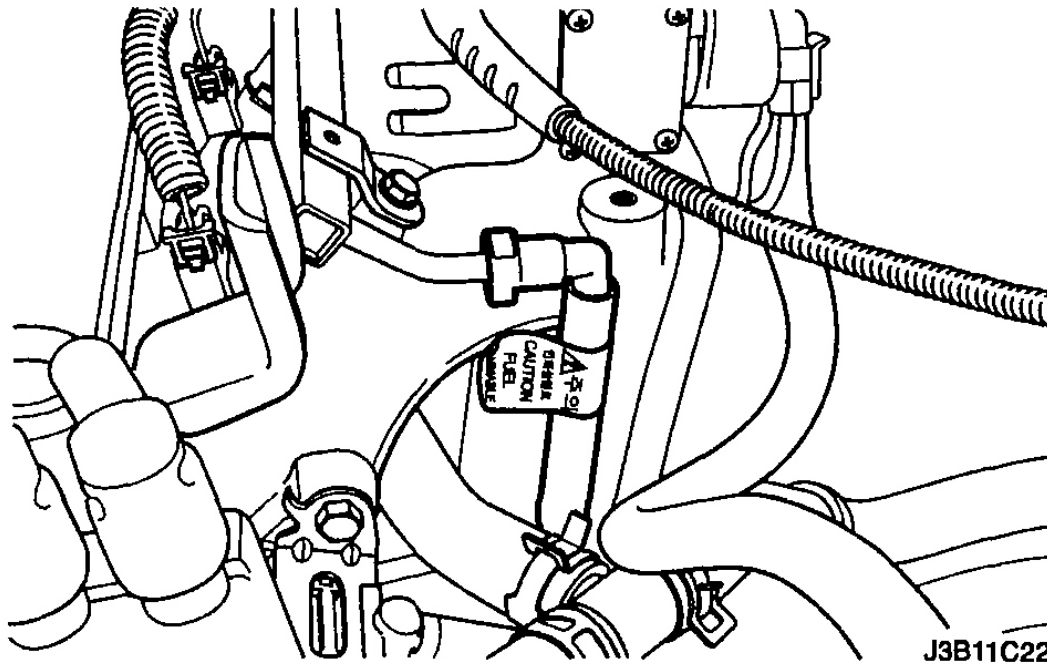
Installing Coolant Hoses And Fuel Rail Assembly
